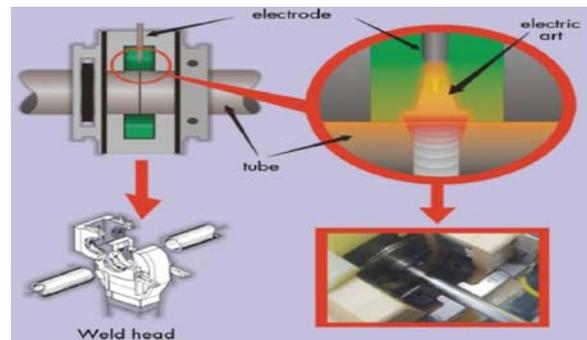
Illustration of a closed-head welding torch of automatic orbital TIG welding⁽¹⁵⁾
